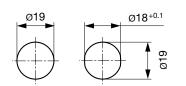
Pins Drawing 2: Pins with Soldering Aid Drawing 3: Clip for Pins
